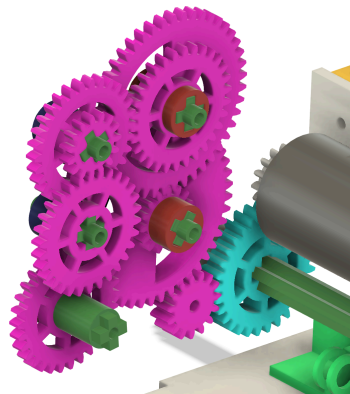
Isometric View of Dispenser Compound Geartrain Reduction
